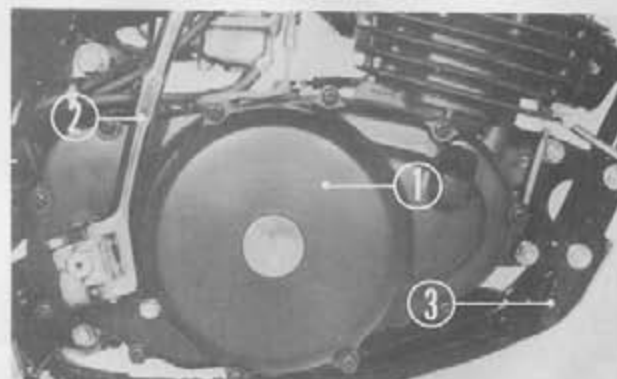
① Right crankcase cover ③ Skid plate
